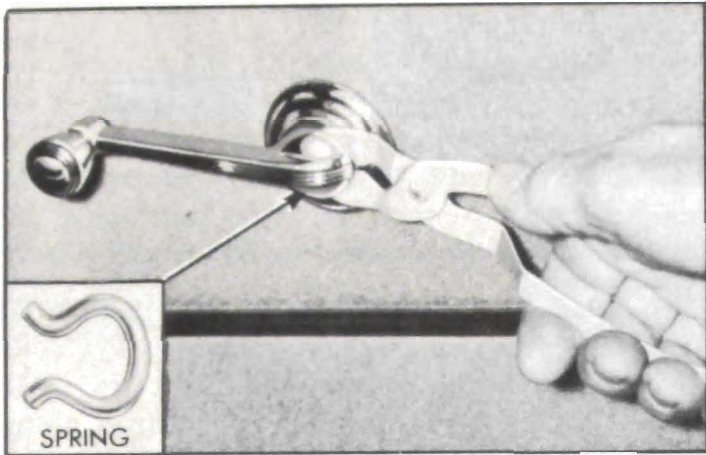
Removing Handle Retaining Spring with Pliers KMO 601
